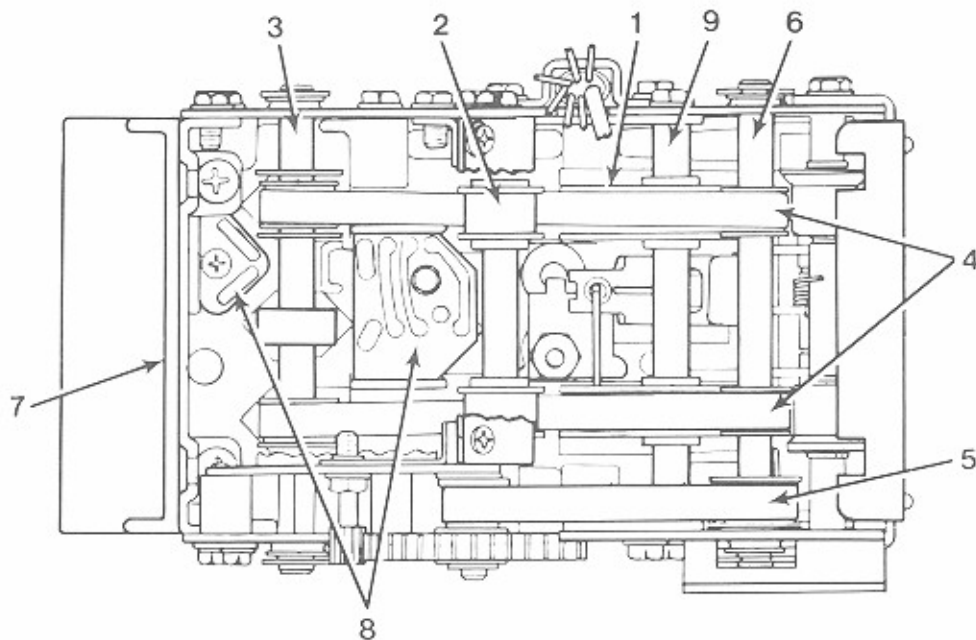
OBA-2 Transport Assembly (Sheet 2)
